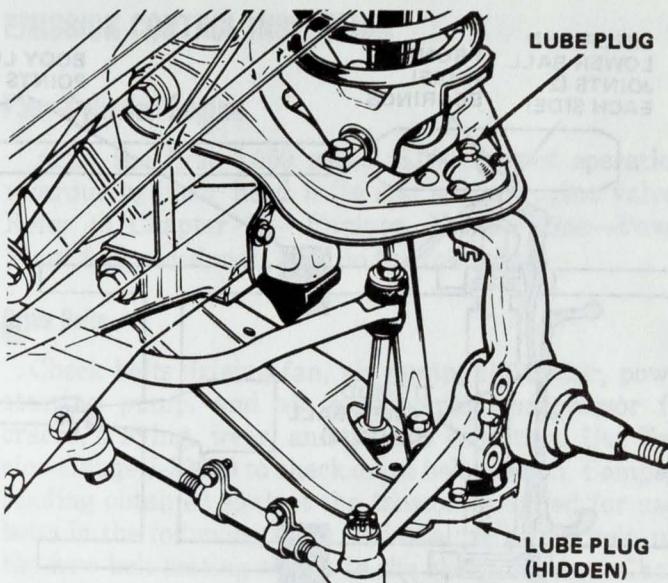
Ball Joint Lube Plugs—Gremlin-Concord-AMX-Matador
